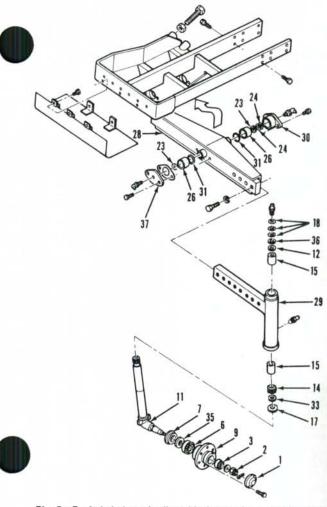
Exploded view of adjustable front axle assembly used on 1710 Offset tractors. Refer to Fig. 3 for legend except for the follow-
